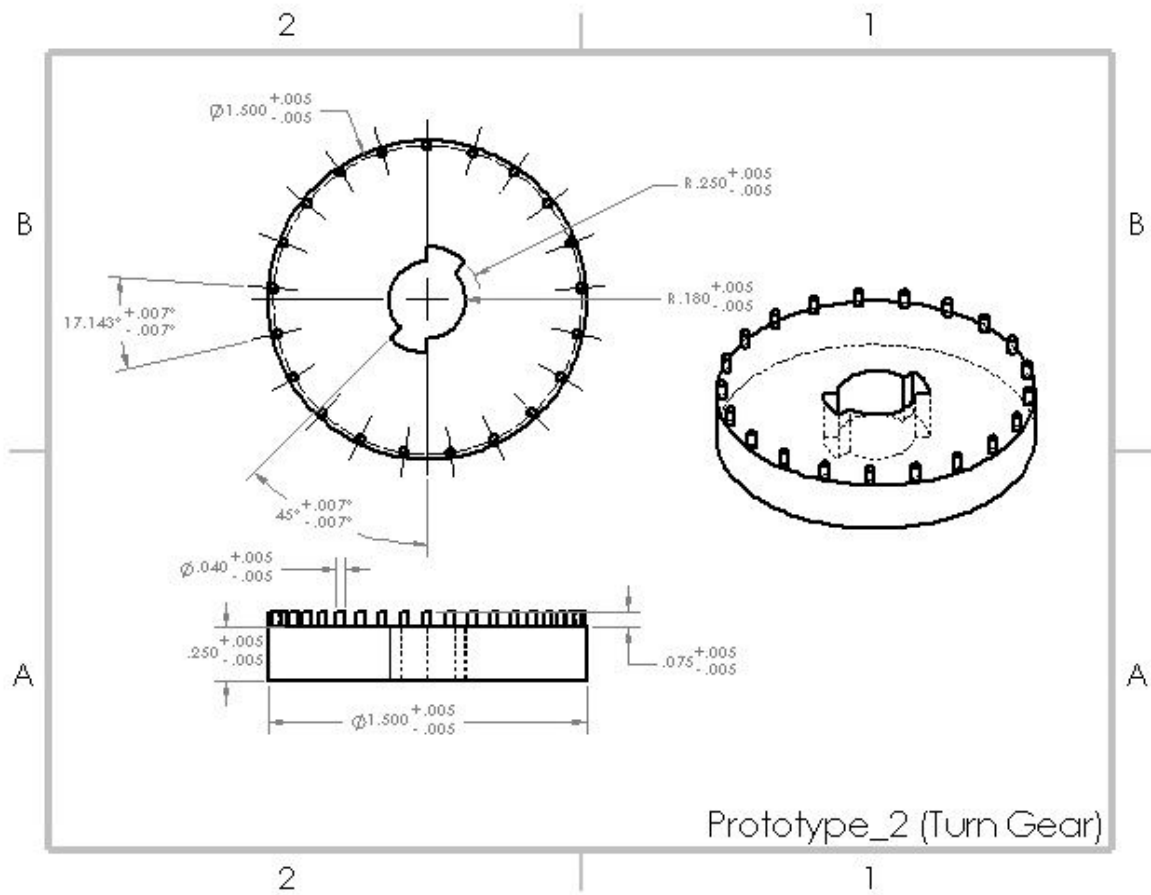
Solidworks 2D Prototype Dependent Gear Drawing with Cross-Section
